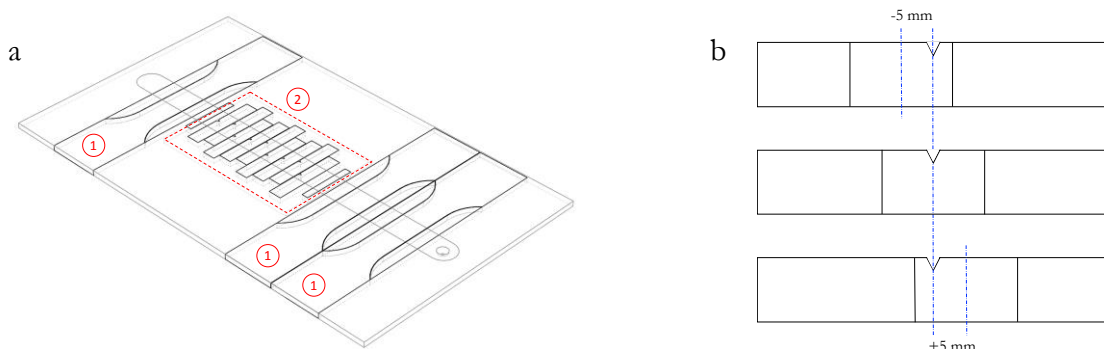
Specimen extraction plan for tensile specimens (1), and Charpy impact specimens (2): a) Specimen extraction plan; and b) Detail of the Charpy notch positions relative to the weld center (stirred zone), weld center +5 mm (advancing side), and weld center -5 mm (retreating side).
